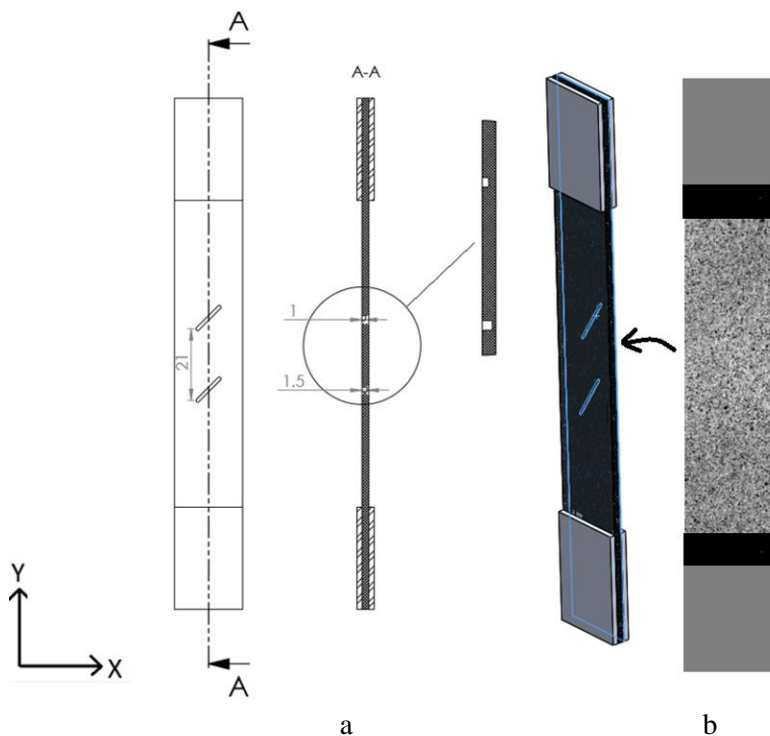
Scheme of the CFRP specimen with 2 fiber cracks (milled slots): a – geometry; b – speckle pattern for DIC measurements
